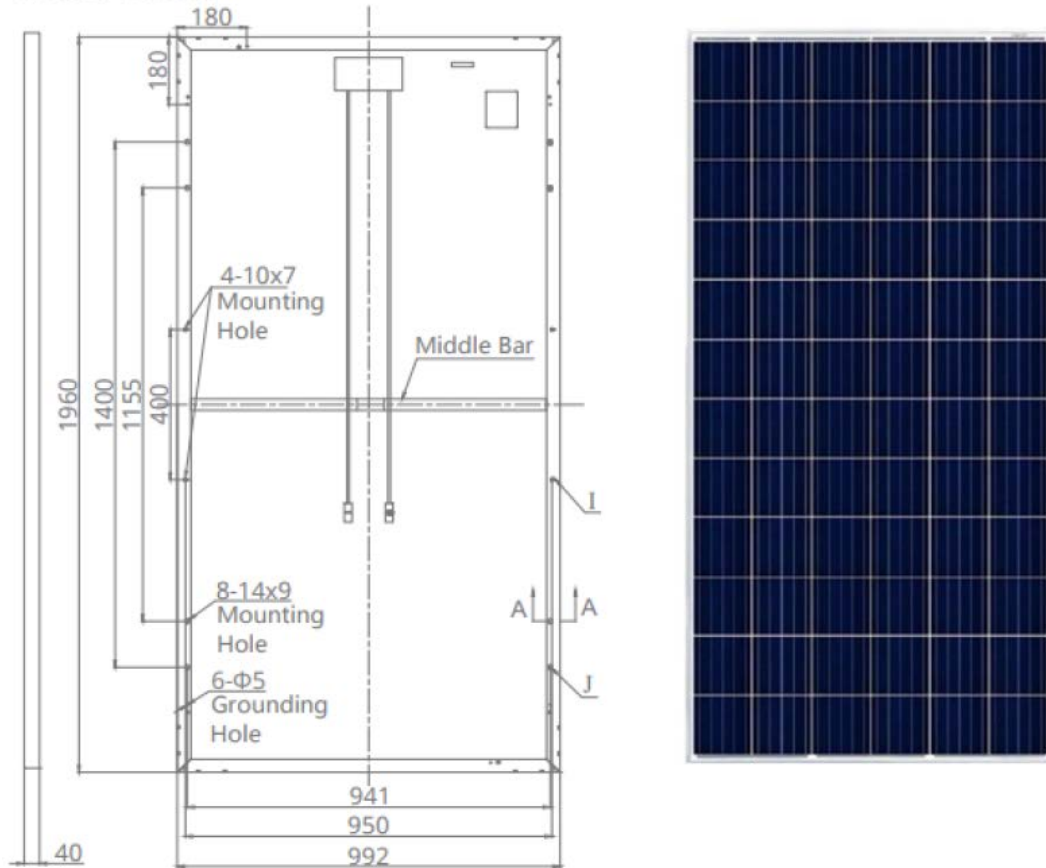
Indicative module dimensions and appearance (Canadian Solar PV Module Product Data Sheet)
